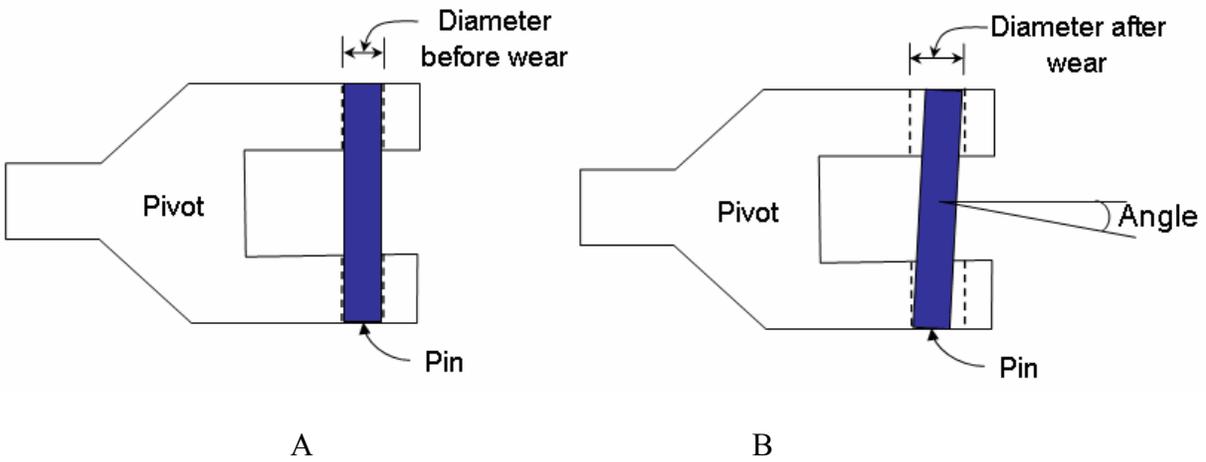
Joint consisting of a pin and pivot: A) Joint before wear has occurred on both components. B) Joint after wear has occurred on both components.
